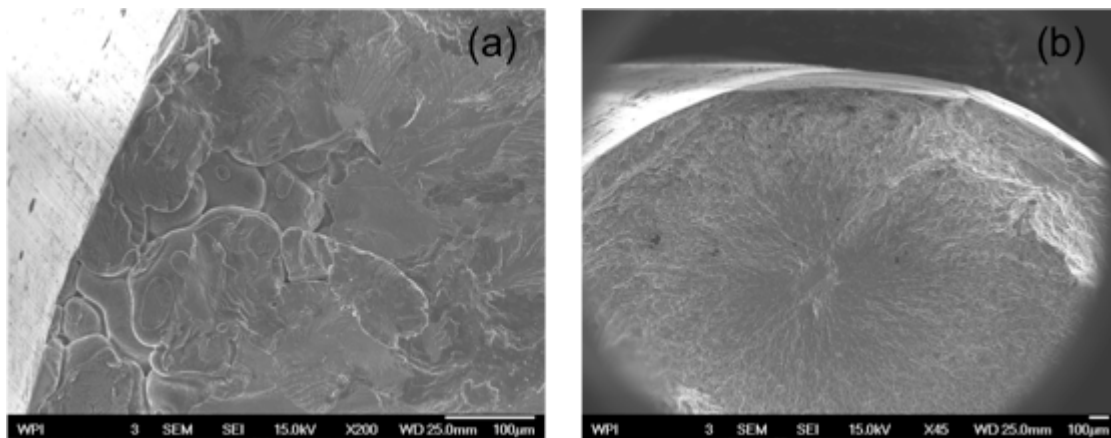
Fatigue crack initiators of (a) as-cast A206; (b) FSPed A206.
